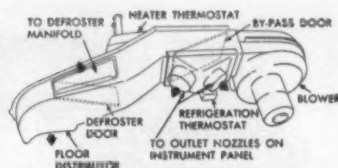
Blower and air duct are mounted on dash panel in passenger compartment on 1956 Chevrolet conditioners.
